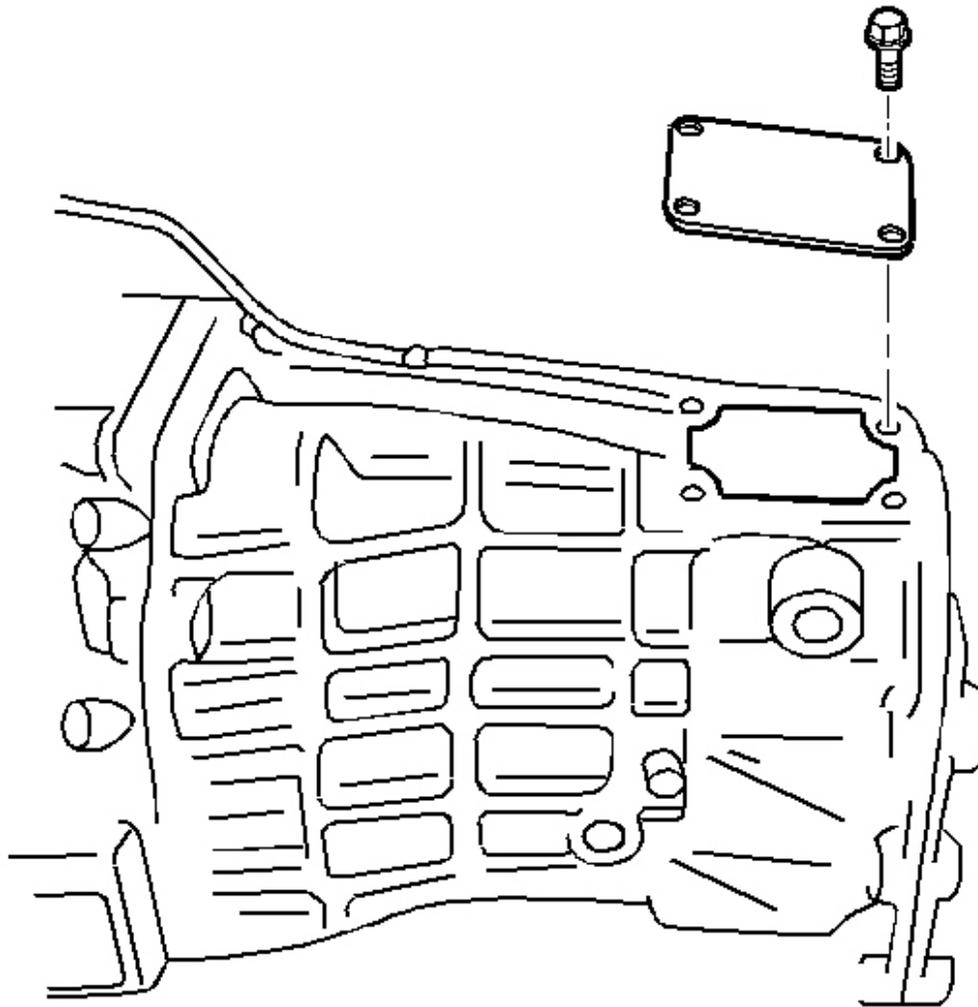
Installing/Removing Cover Plate & Cover Plate Bolts
